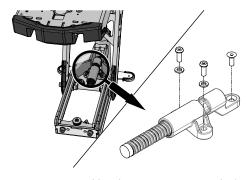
Assembling the spring unit, it is attached with three screws and washers.
